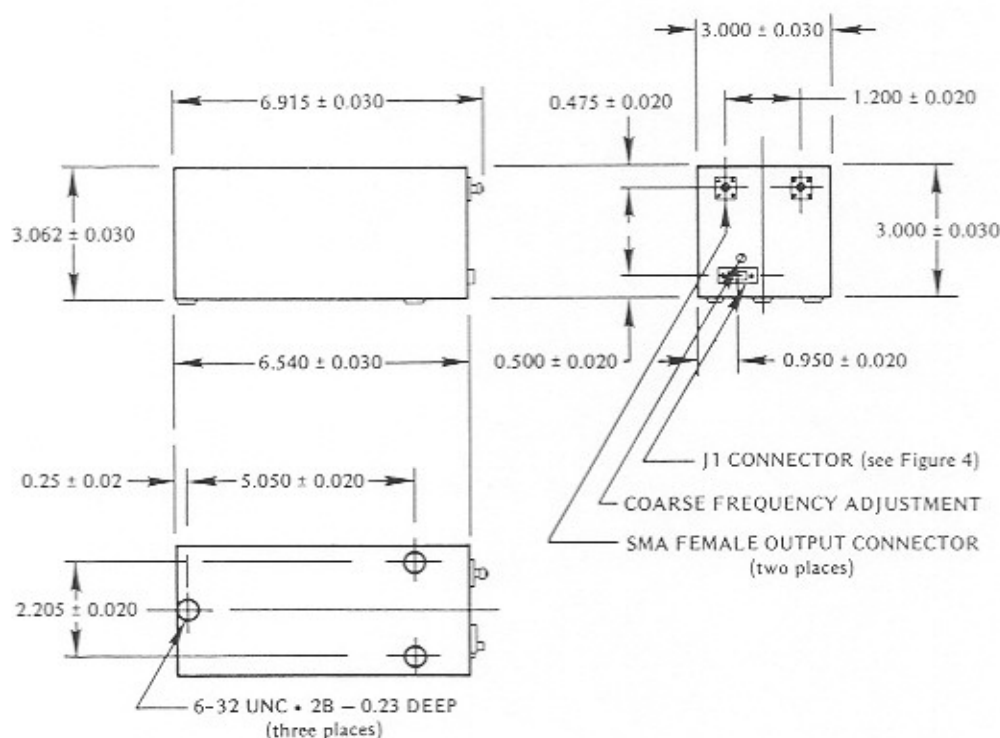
Outline drawing of the FTS 1000 (dimensions are given in inches).
